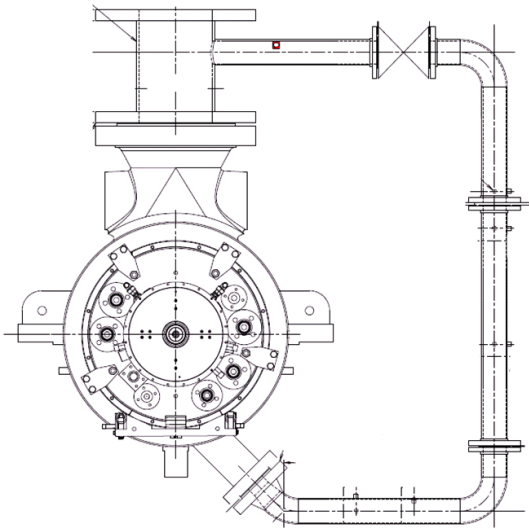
Factory Test Piping Shown in Front Elevation View.
